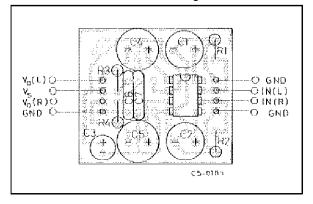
P.C. Board and Components Layout of the Circuit of Figure 2
